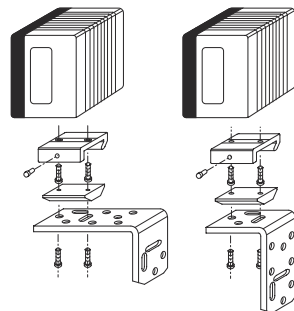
Mounting example of a CLV69x with combination of quick clamping device and mounting bracket
